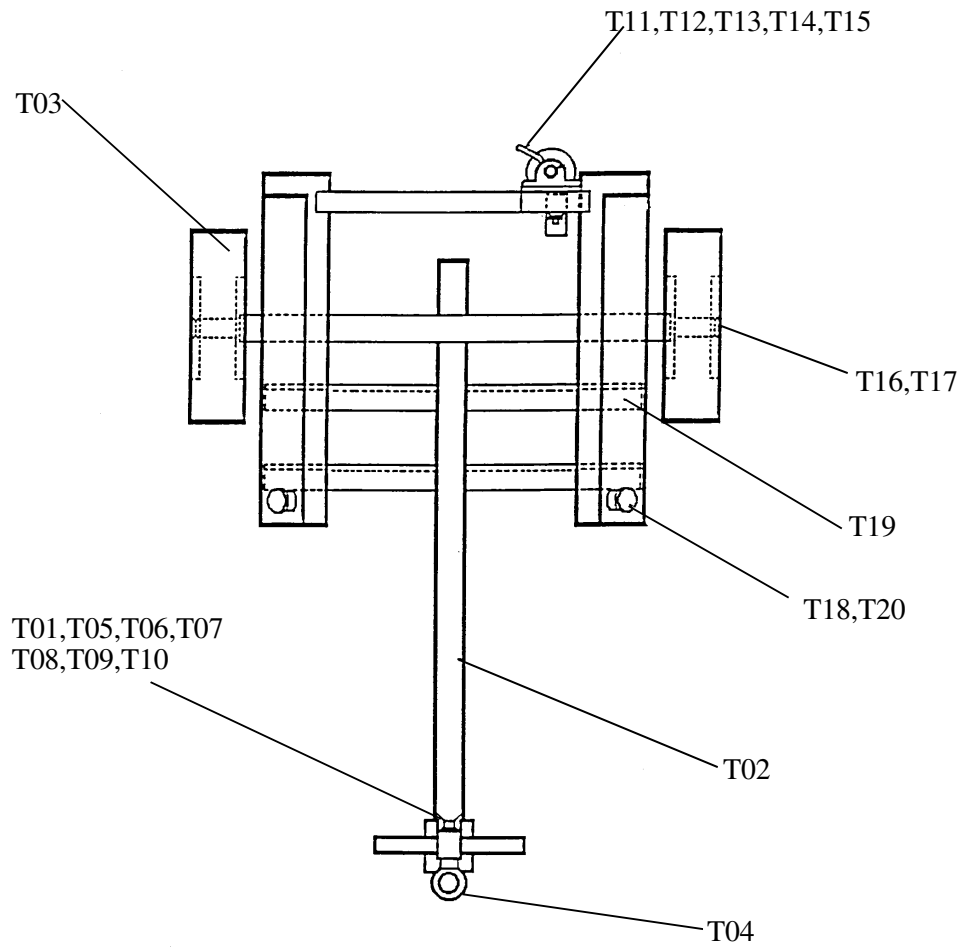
Two Wheel Site Trailer Assembly (Diesel Engine)
